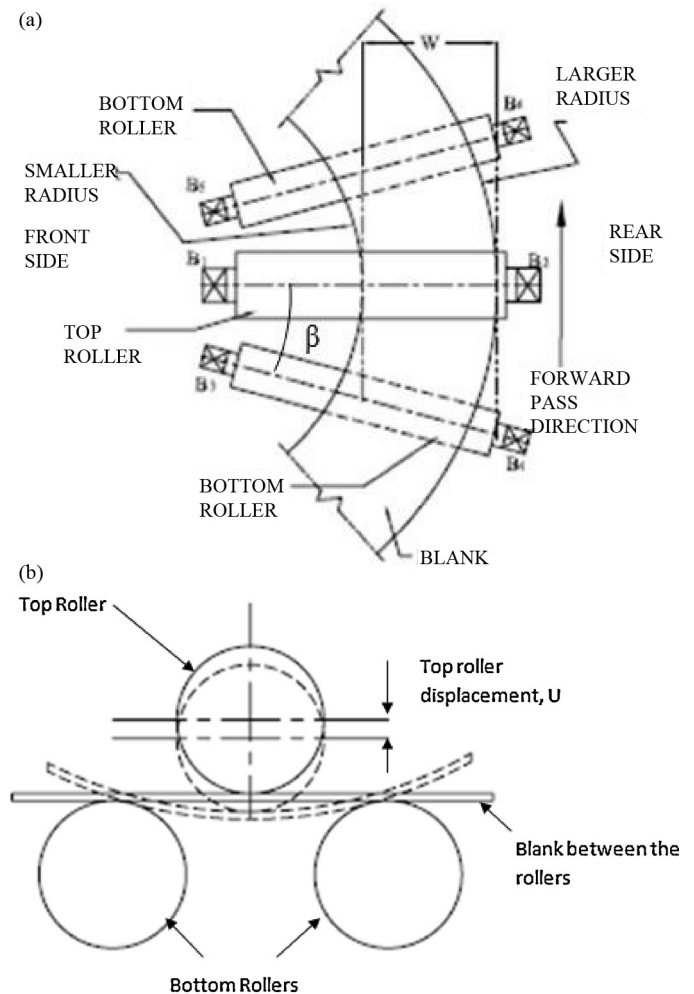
Schematic arrangement of 3-roller conical bending setup.
